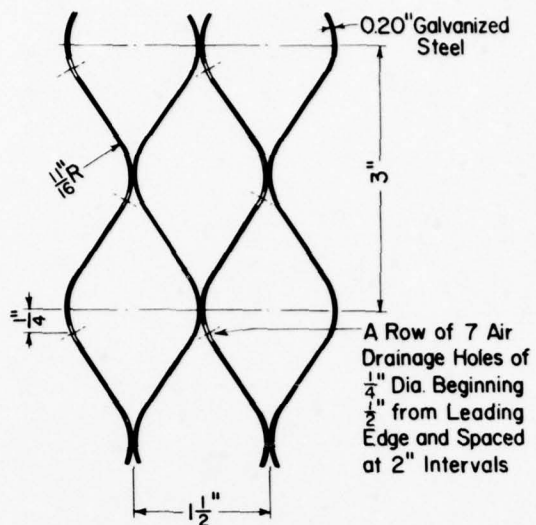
Configuration of Air Separator Tube Employed in the 6-Inch SAF Tunnel
